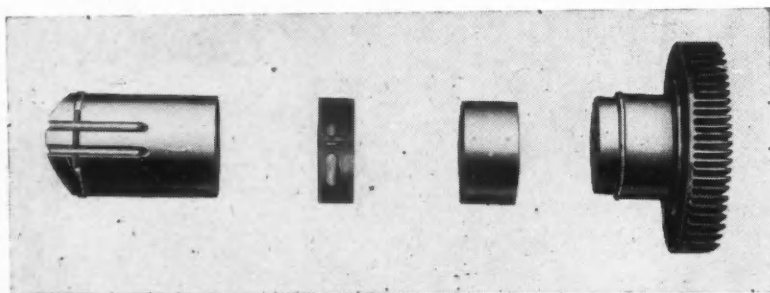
Cylinder head with sealing spring and reeds, sealing ring, port ring, and cylinder.
